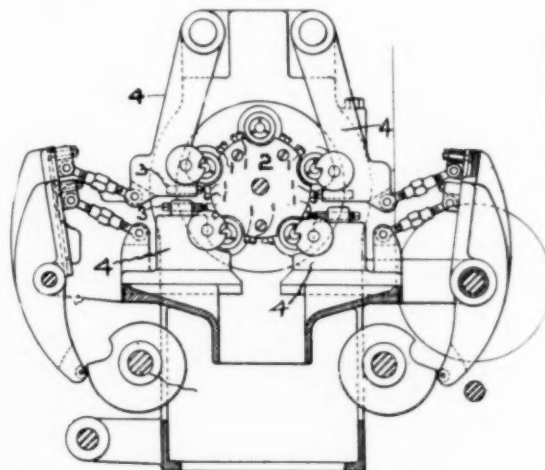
MEANS FOR RECTIFYING THE INDEXING OF MULTIPLE SPINDLE MACHINE. DAVENPORT MACHINE CO.
